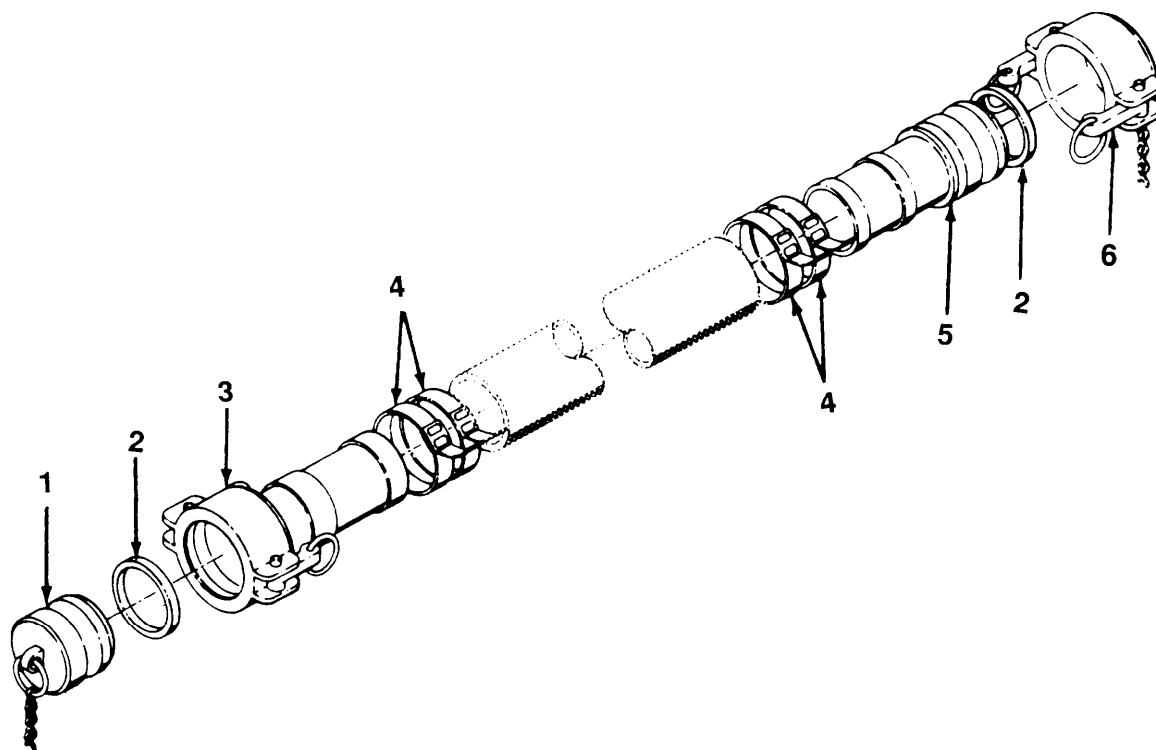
Discharge Hose Assembly, 4 In. X 25 Ft.
